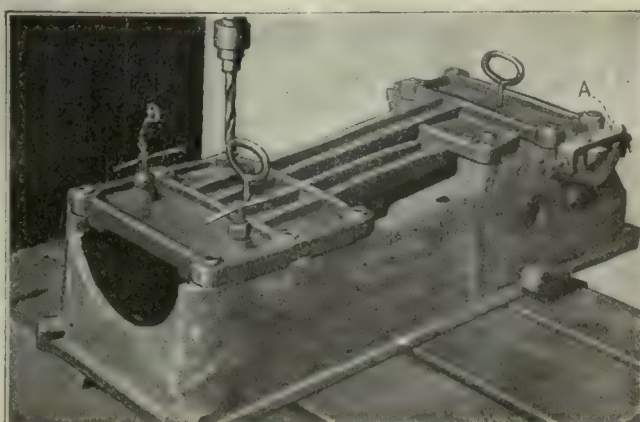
DRILL JIG COVERING TOP FACE OF ENGINE BASE
